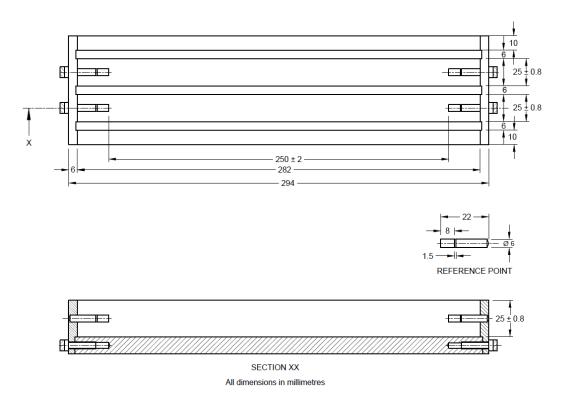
Typical Metal Bar Mould (Two Mould Compartments)
